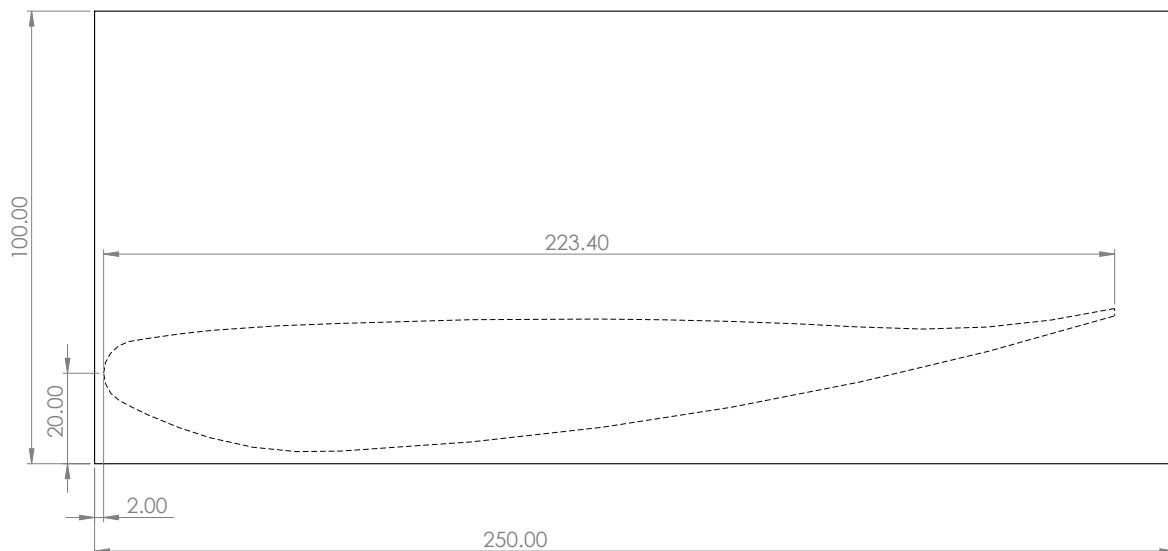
Dimensions of the side view of the front wing showing the endplate along with the airfoil (all dimensions in mm) [Pathanadka, 2022; Zerihan and Zhang, 2001a]
